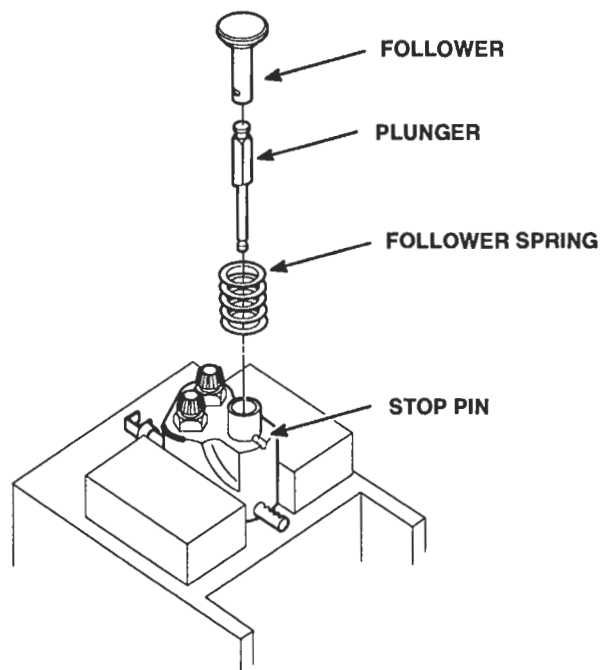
Removing or Installing Plunger Follower, Plunger and Spring
